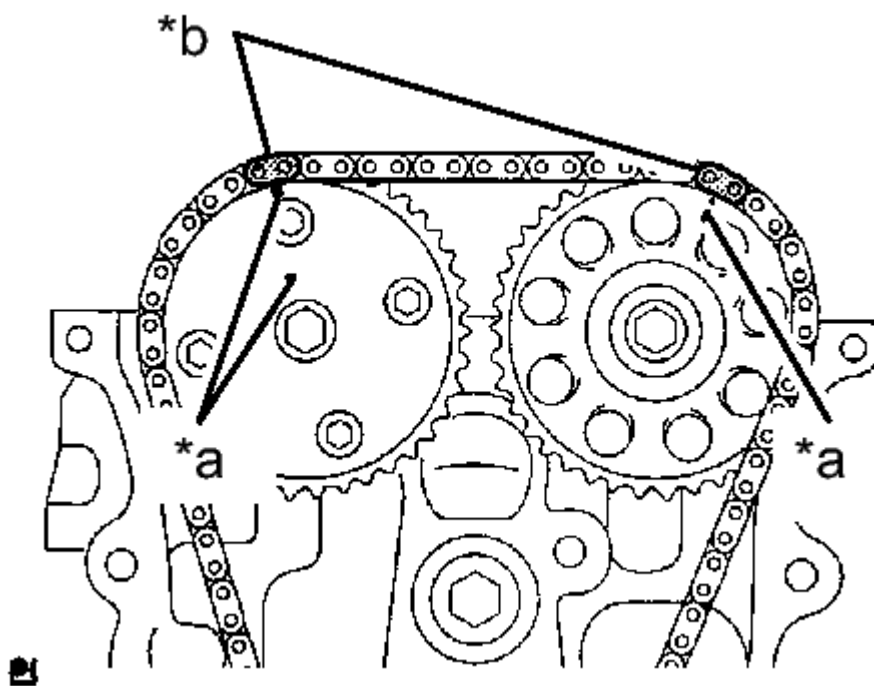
Aligning Timing Marks On Camshaft Timing Gear And Sprocket
